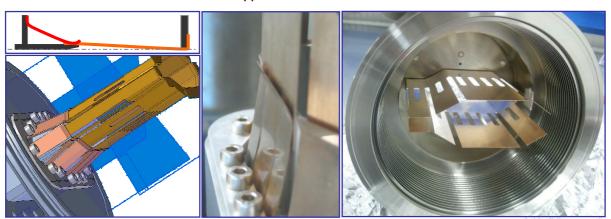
Drawings and pictures of the "finger / sleeve" RF-coupling
